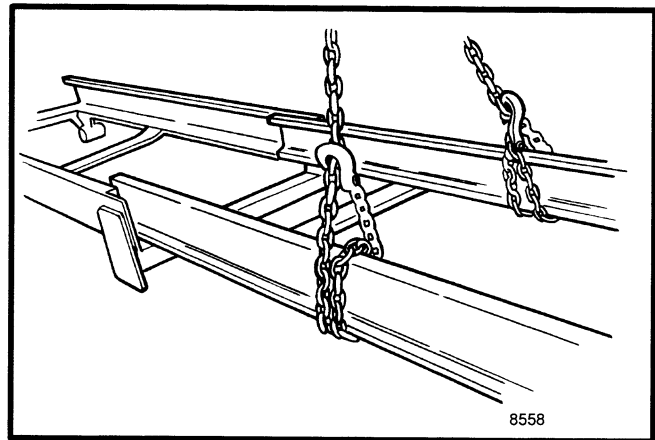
REMOVAL OF INNER WELDMENT
